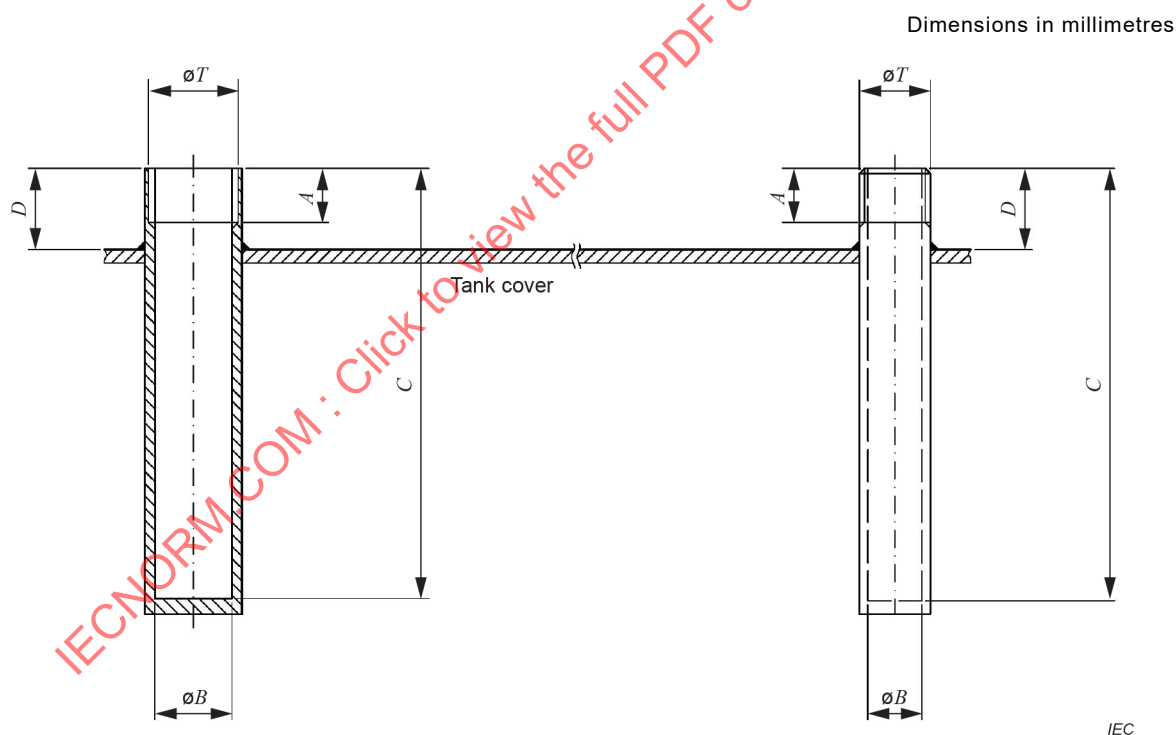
Thermometer pocket with female (left) and male (right) thread
